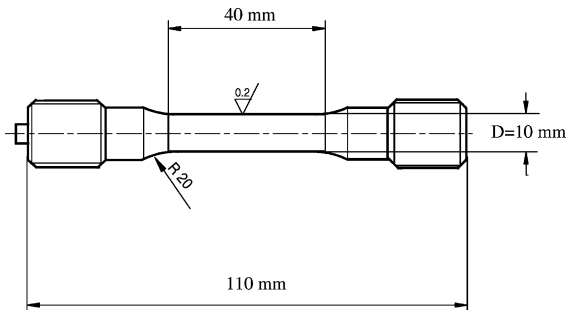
Dimensions of LCF specimen. The specimens were fabricated utilizing low-stress grinding and polishing.
